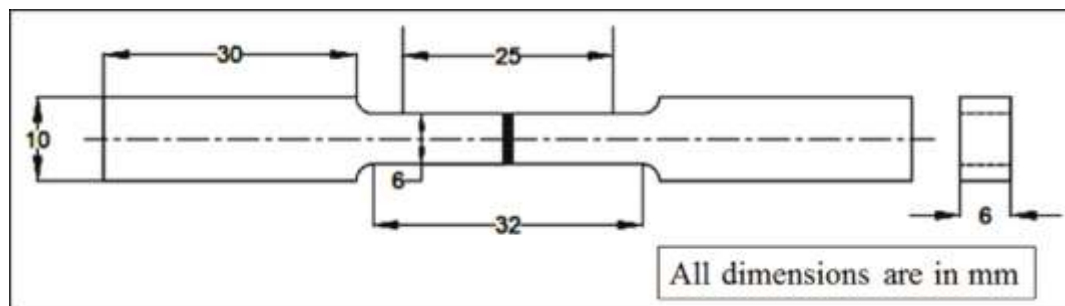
ASTM E8 Test Specimen [ASTM Standards]
